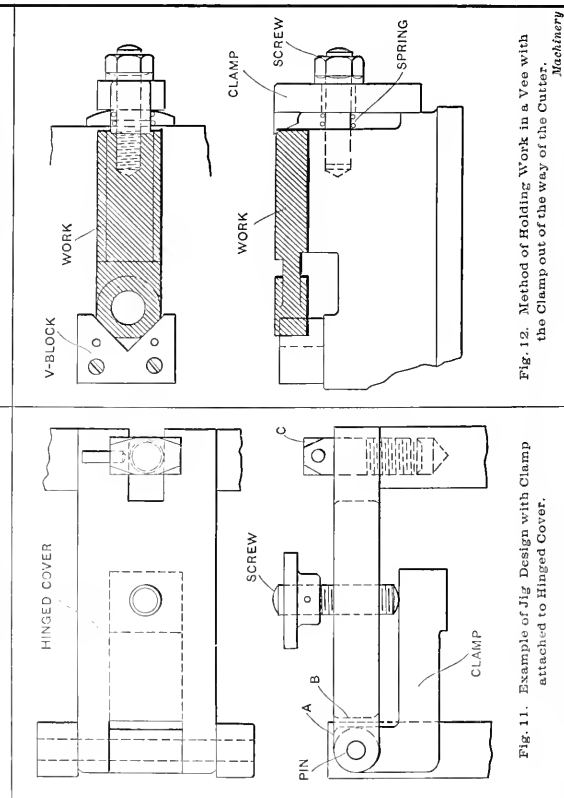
Method of Holding Work in a Vee with the Clamp out of the way of the Cutter.
